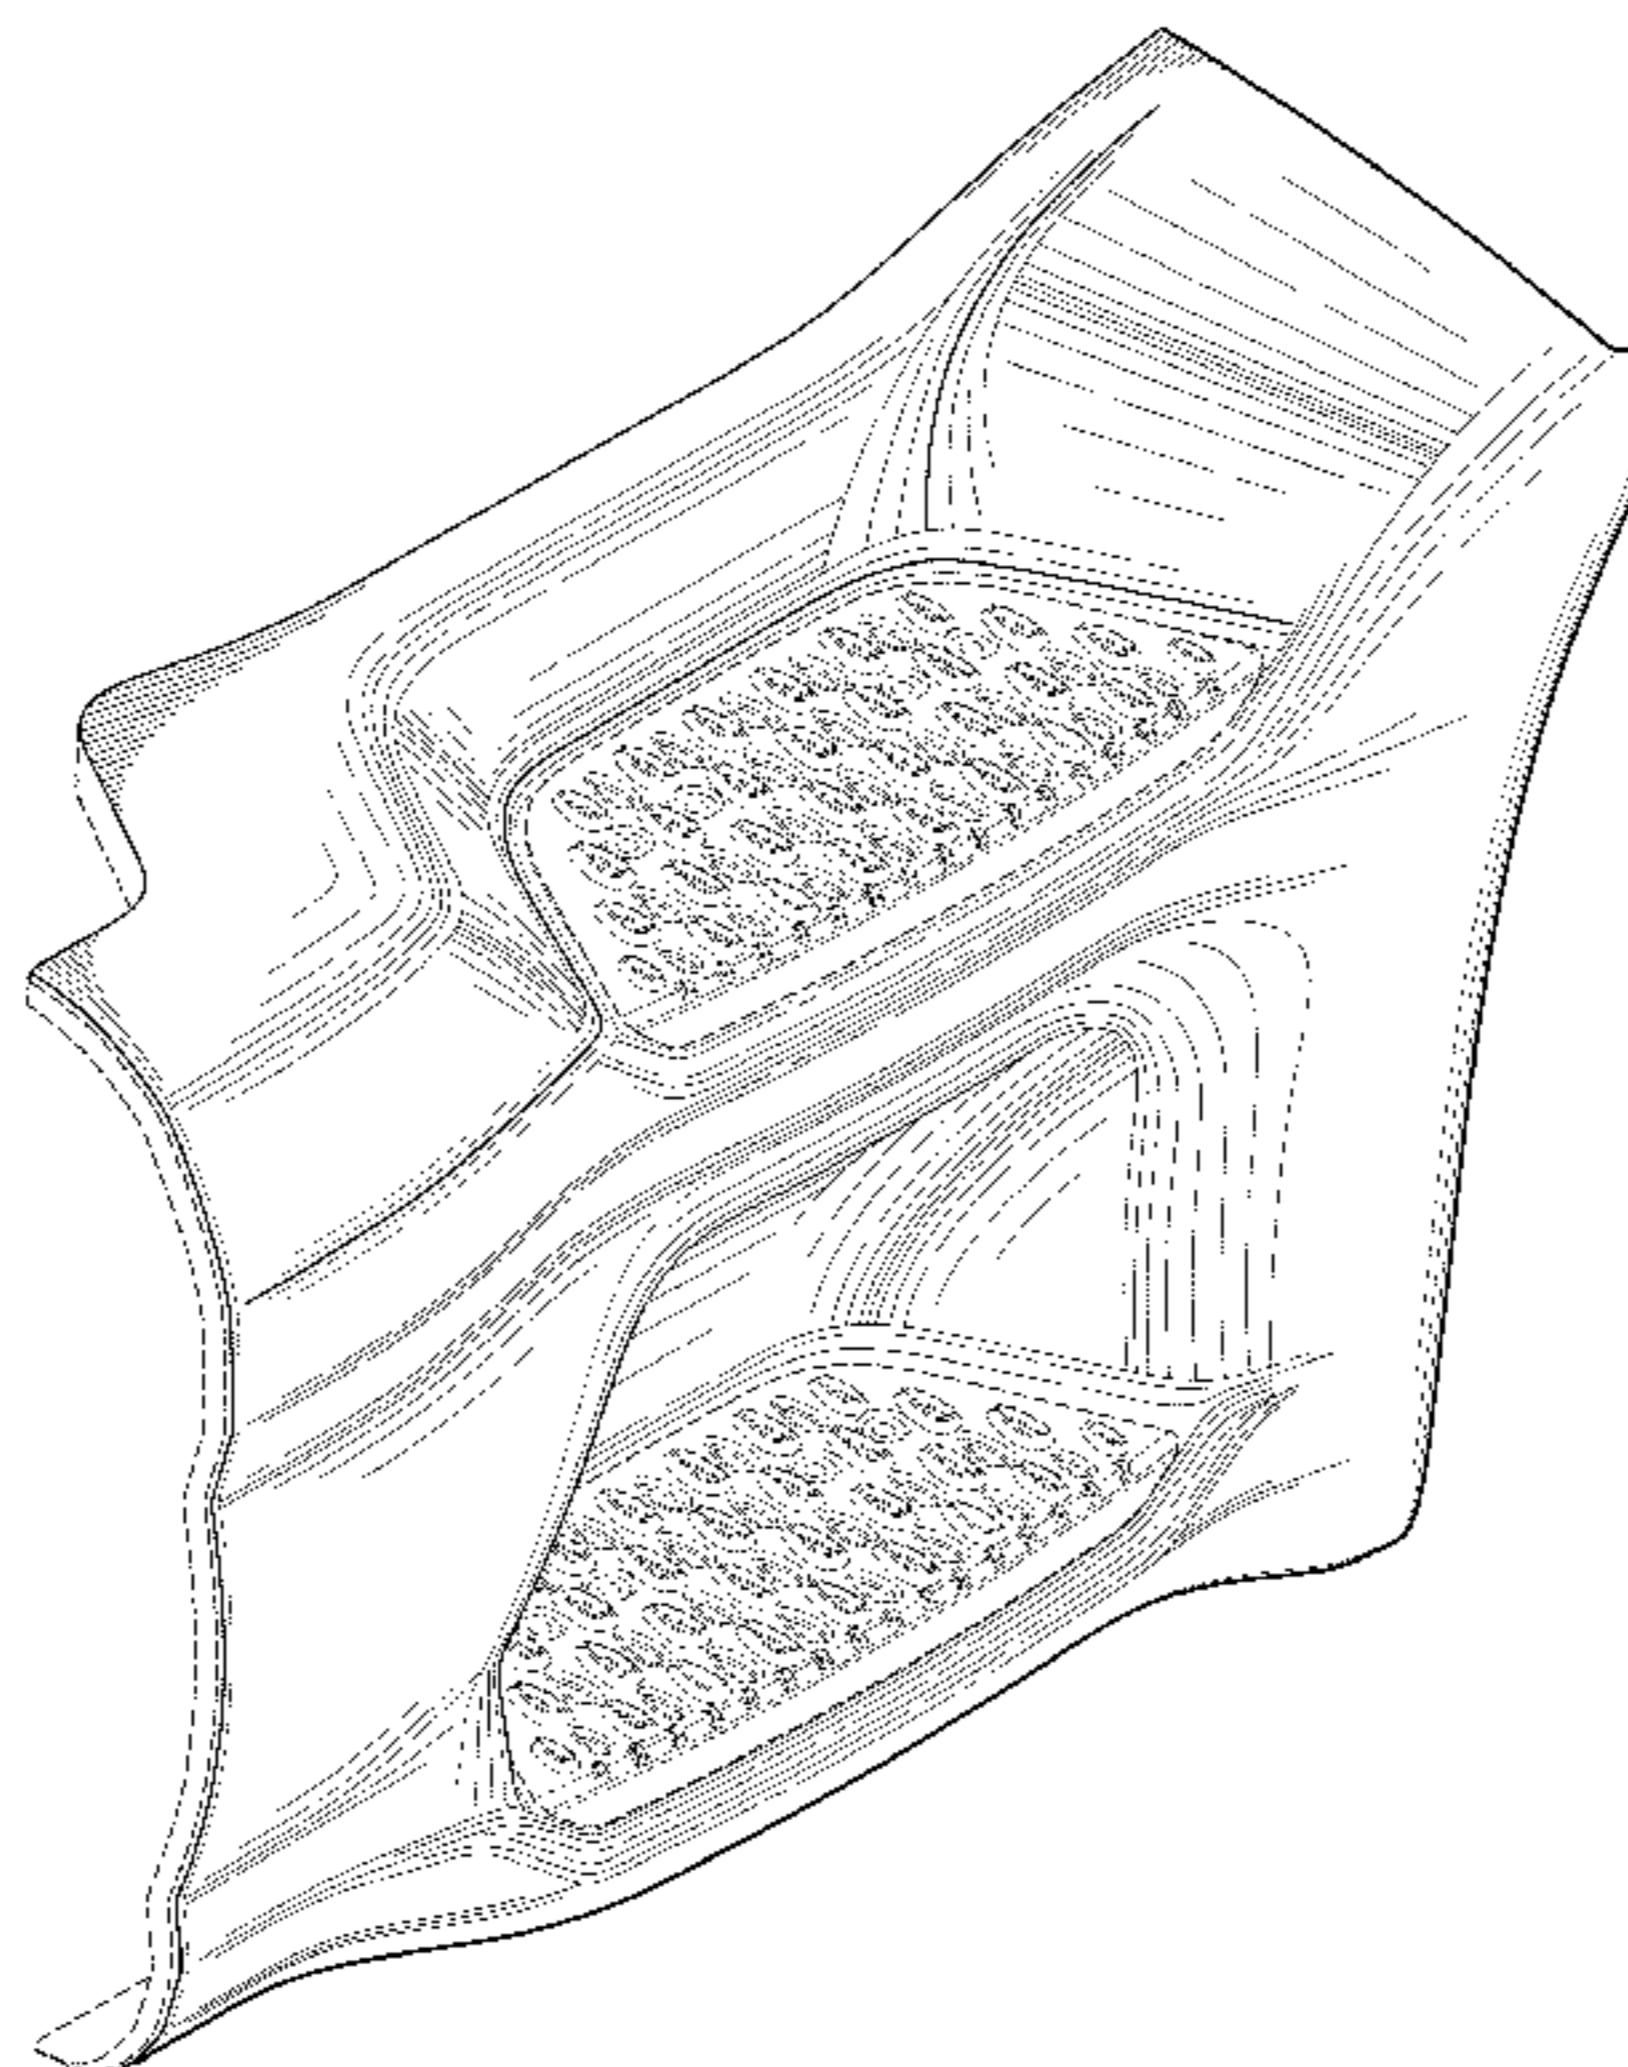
is a side view of the rear chassis fairing taken from the left side of FIG. 1; and,
